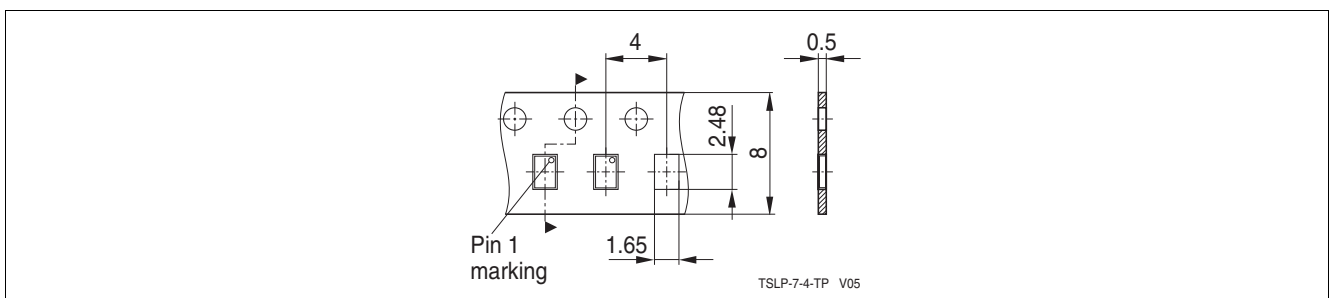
Tape & Reel Dimensions (\varnothing reel 330, pieces/reel 7500)
